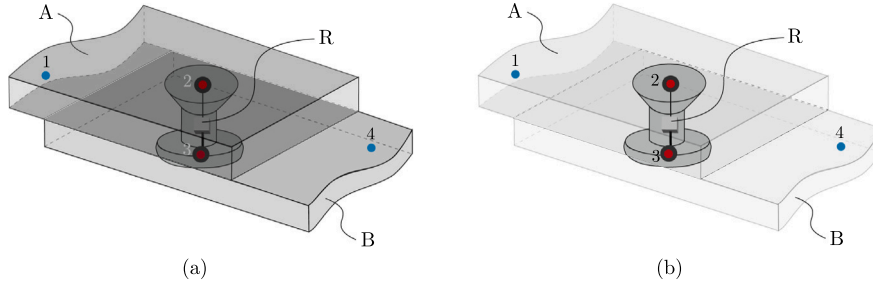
Riveting process: driven head of the rivet is deformed by applying the squeezing force  $F_{sq}$  in order to join metal sheet plates A and B.
